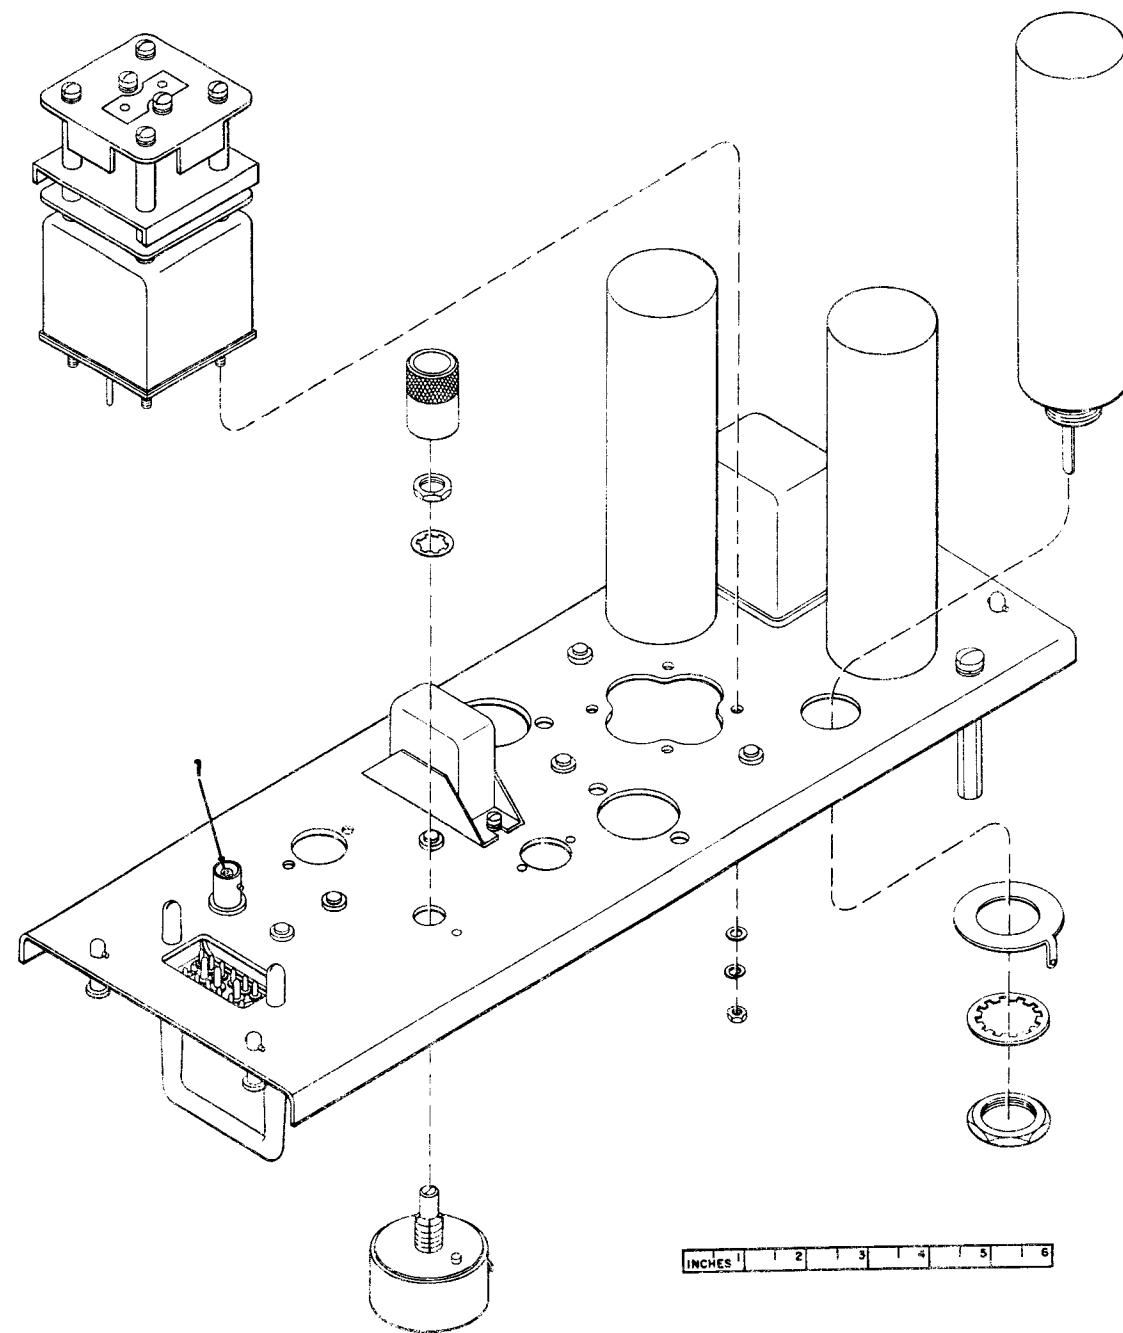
Generator, pulse O-303/M (8007725) – partial exploded view
